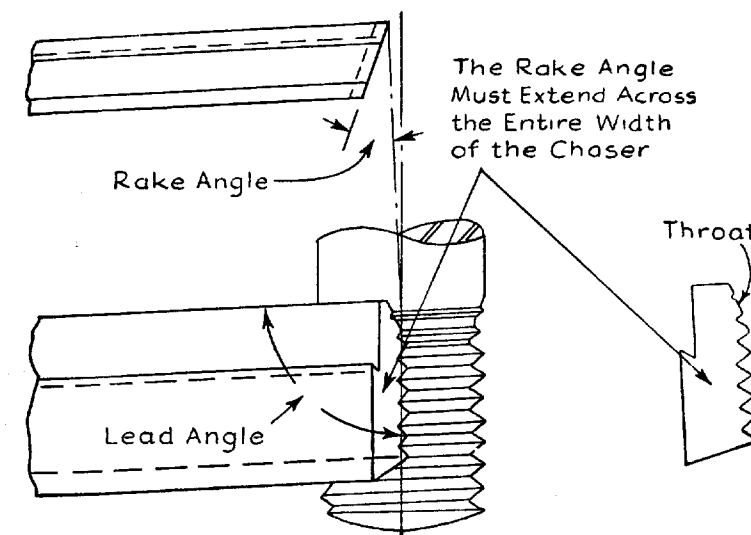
Chaser grind for cutting straight threads cut with lead screw feed
